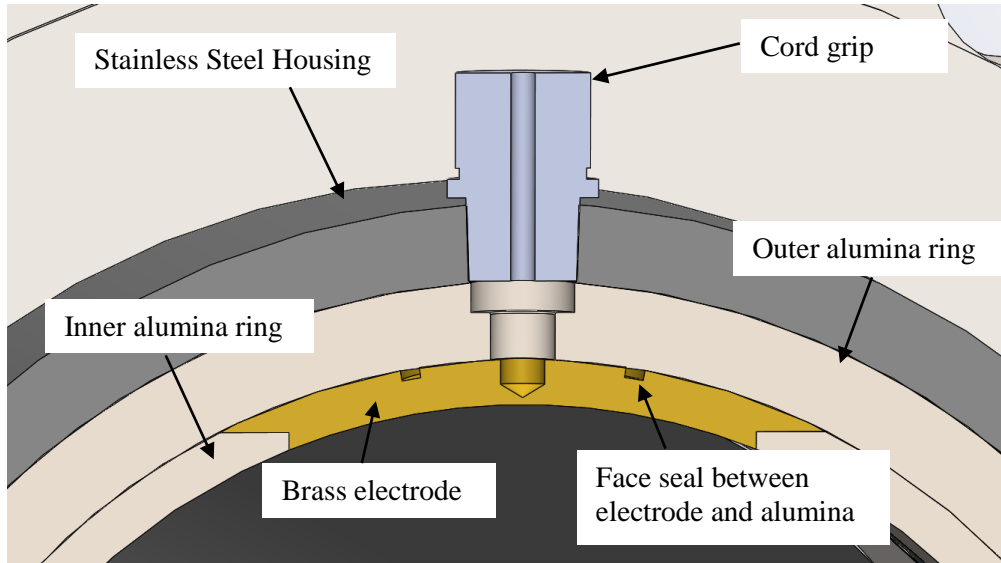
Axial cross-sectional view of MPFM for electrode sealing and wiring detail
